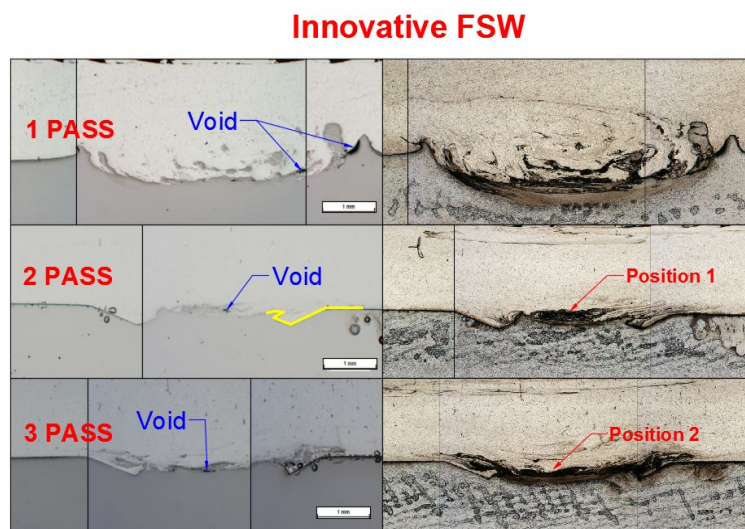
Optical macrographs of multi-pass welds with innovative faying surface which were carried out as same welding parameters as weld 3.
